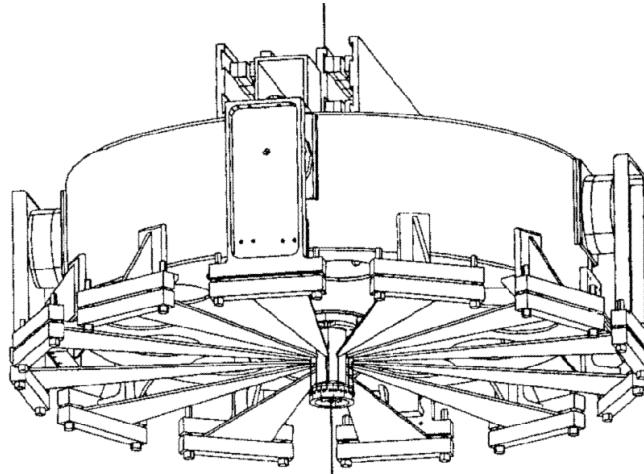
The mechanical filter: perspective view. Notice the twelve triangular blades.
